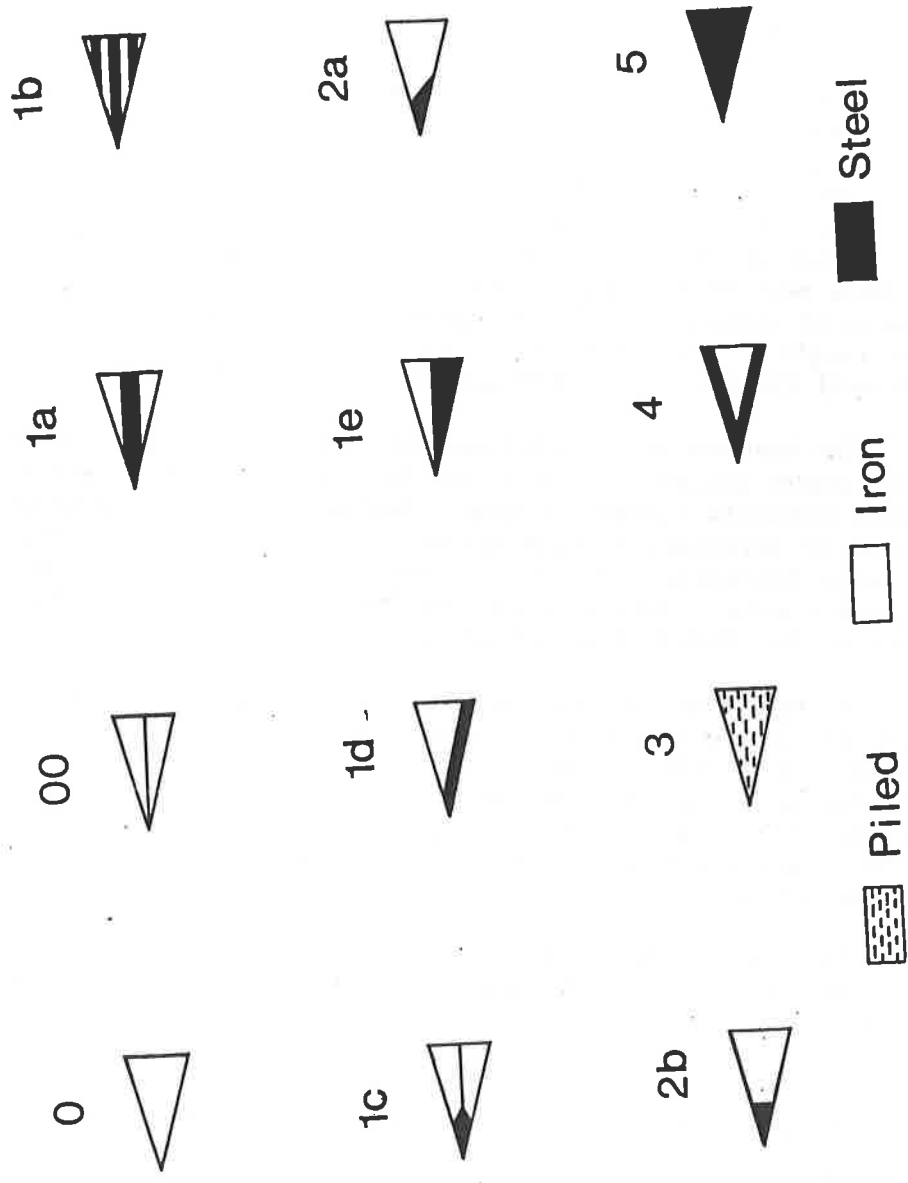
Methods of welding iron to steel to make blades.
